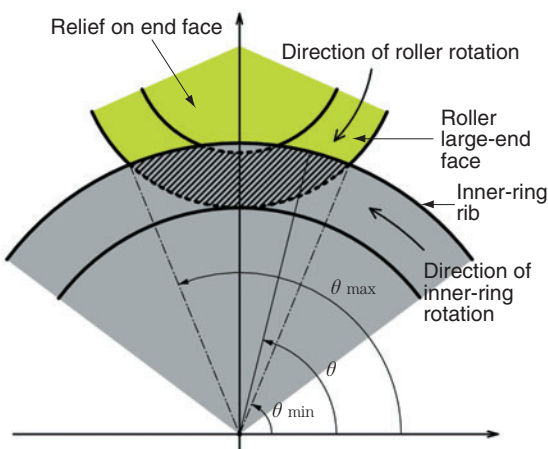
Sketch of interaction between roller large end face and inner-ring rib
